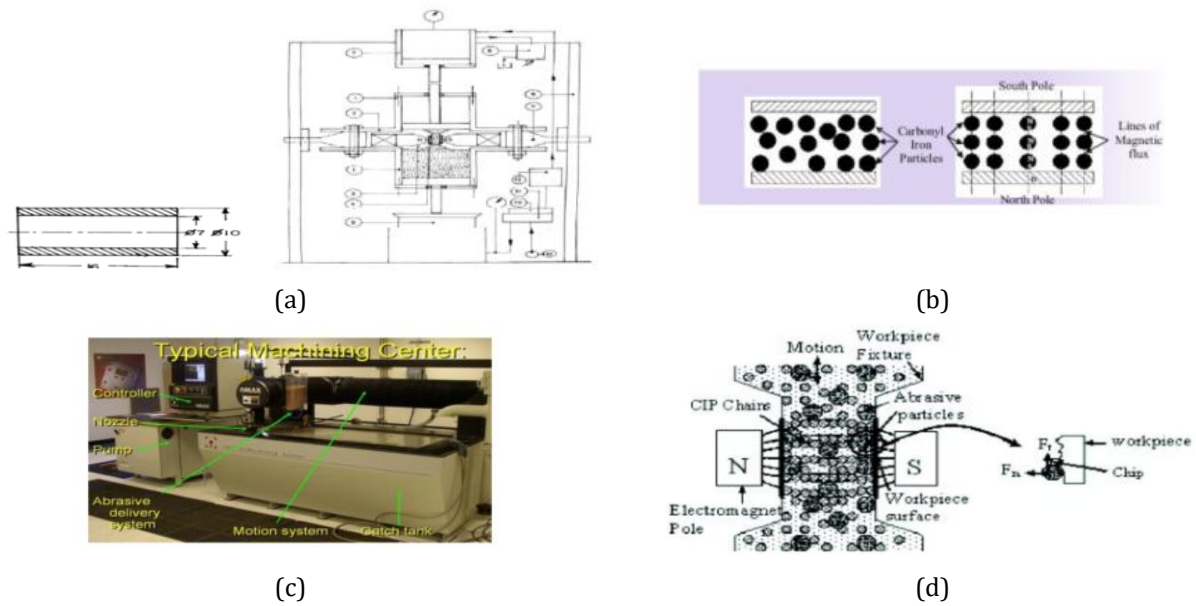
(a) Workpiece & MAFM, (b) Principle, (c) Machining, (d) Mechanism [37].
